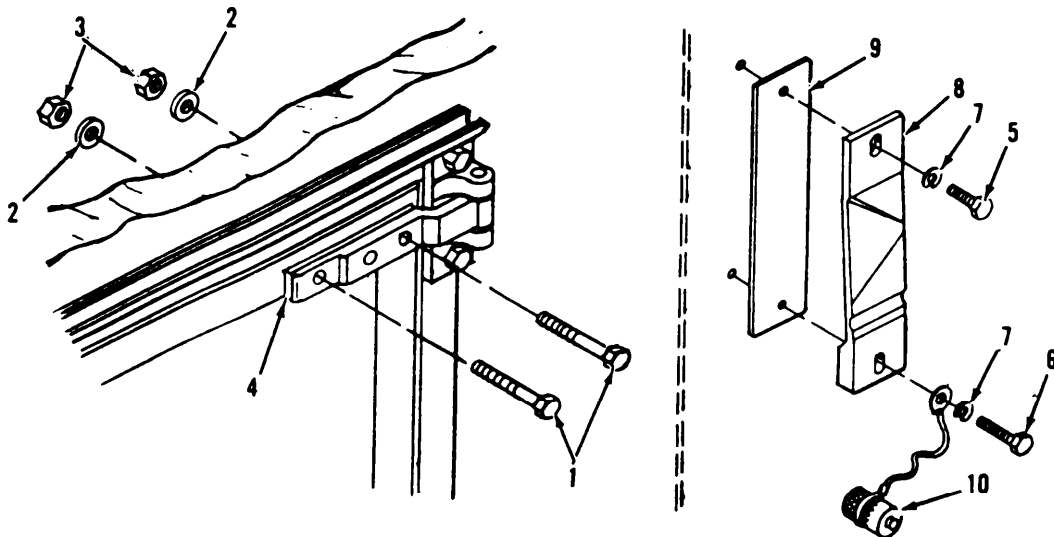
Weather Gasket and Seal Pressure Adjustment.
